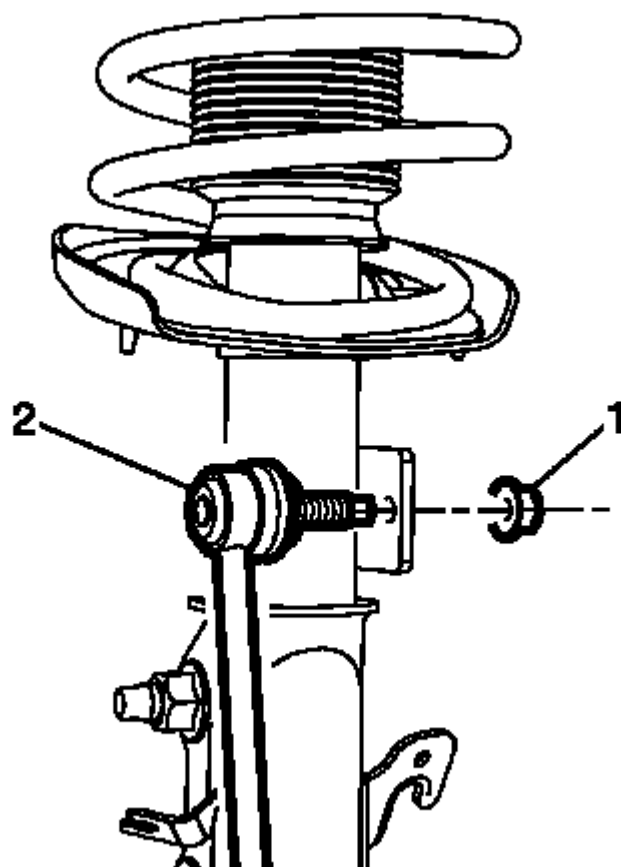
Stabilizer Link & Front Stabilizer Shaft Nut
